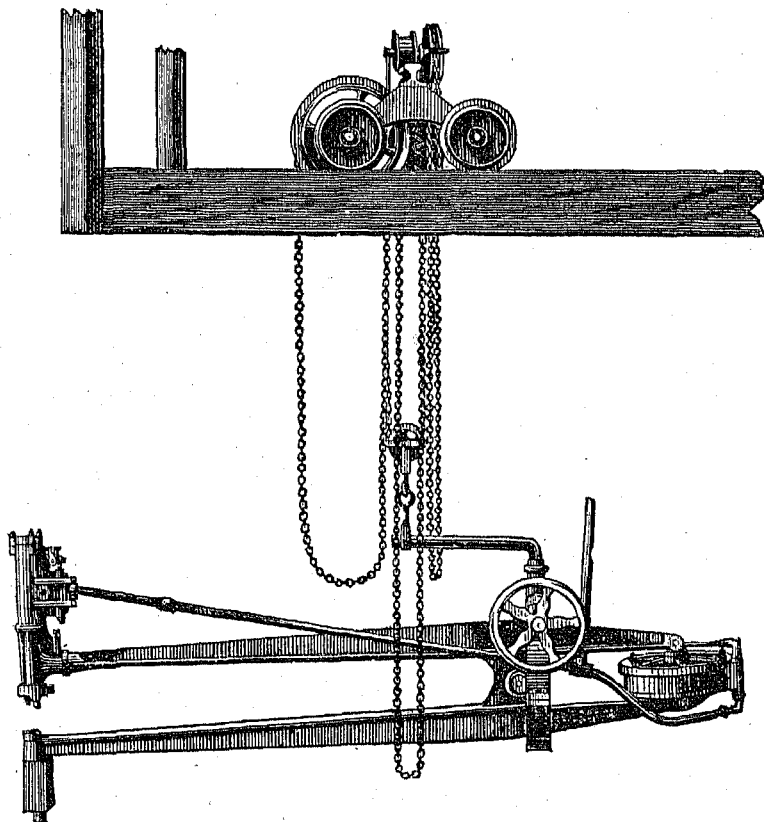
PORTABLE PNEUMATIC RIVETER.
